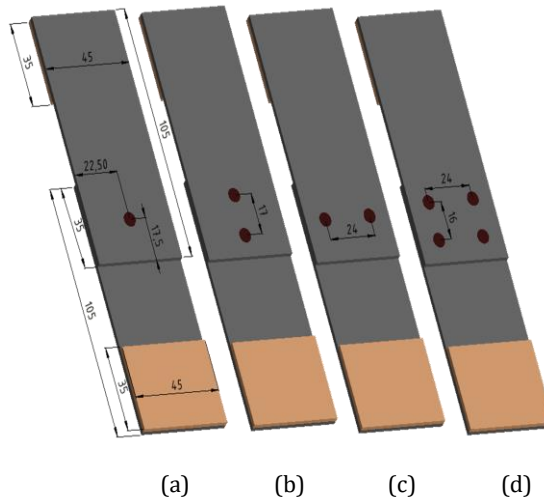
Typical geometry of tensile shear spot welding samples including multi-points, a-Single point welded(OP), b-Welded from two vertical points(TVP), c-Welded from two horizontal points(THP), d-Four point welded(FP).
